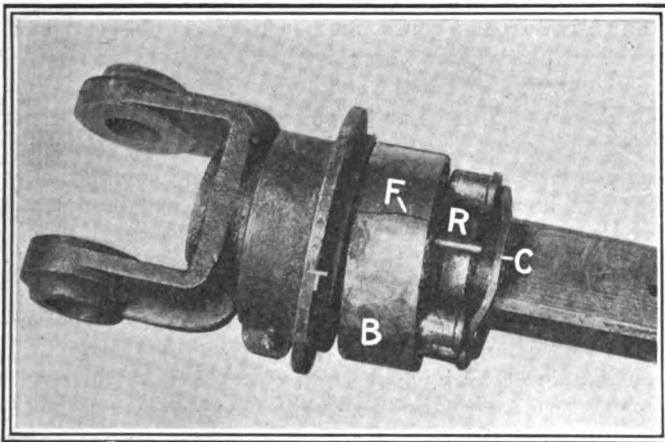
A universal joint which has been broken by being knocked too far out of alignment
